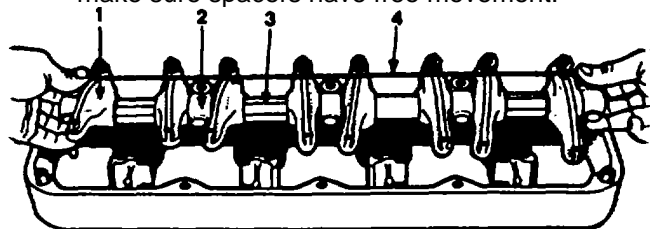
Method of Holding Rocker Arm Assembly Together for Installation
